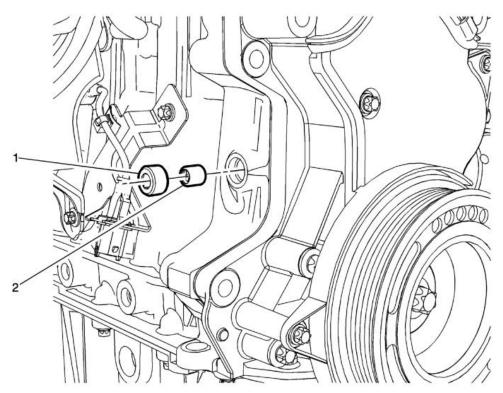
Oil Flow Check Valve & Bore Plug Courtesy of GENERAL MOTORS COMPANY
